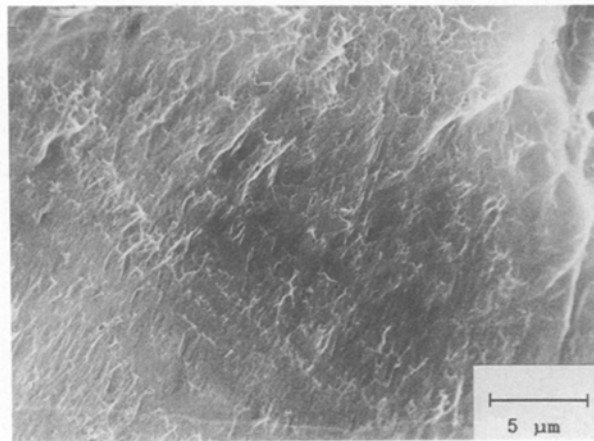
Grain-boundary facet on fracture surface of a WQ specimen fractured at RT.
